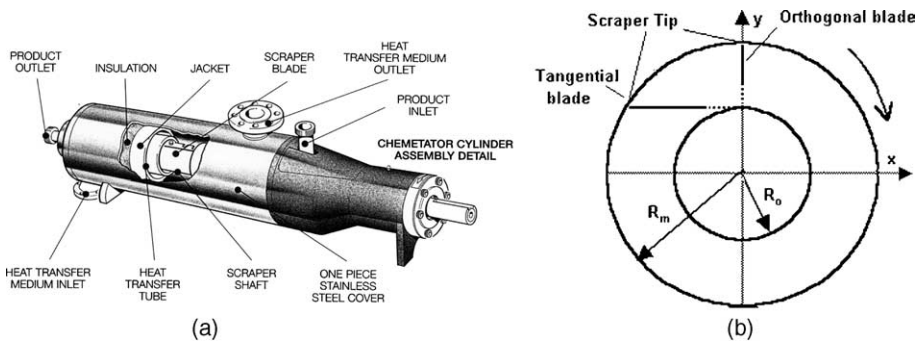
(a) Expanded view of a scraped surface heat exchanger and (b) schematic view of the 2D cross section studied.
